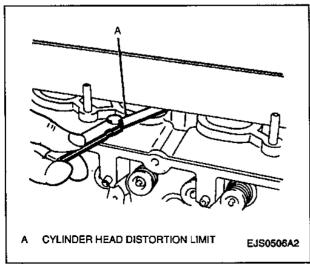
Measuring Exhaust Manifold Seating Surface Distortion
